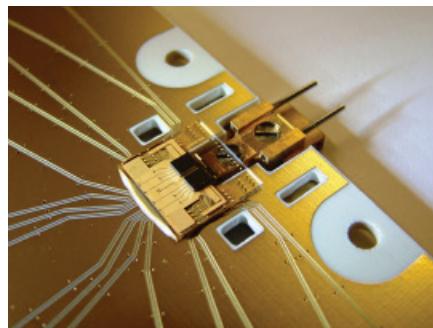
Glass interposer with assembled components mounted on a printed circuit board [9].
